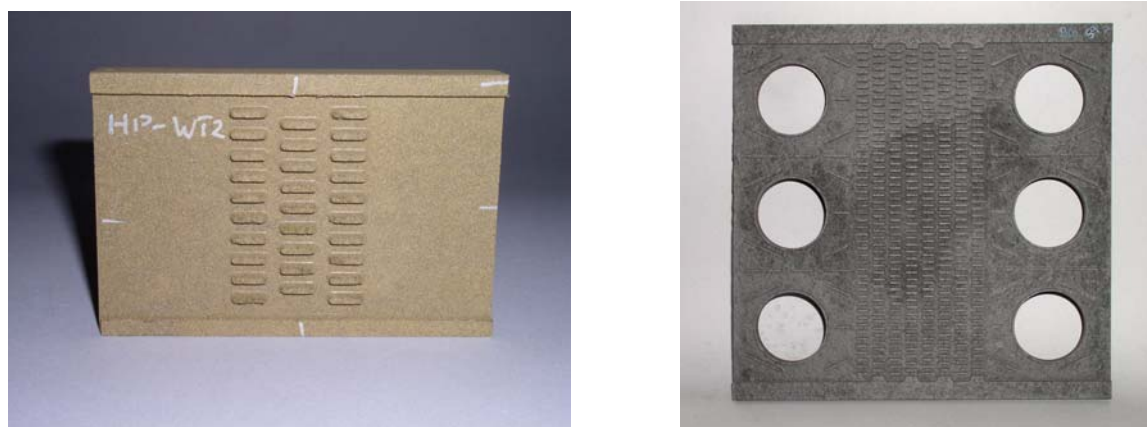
DLR prototype wood composite test plate (left, 80x120 mm²) with fins (length~ 10 mm). DLR prototype HX plate (~ 300x300 mm²) in OSF design made from carbon bulk material with high expense in machining. Dimension of fins: 4 mm in height, 2 mm in width, and 10 mm in length (right).
